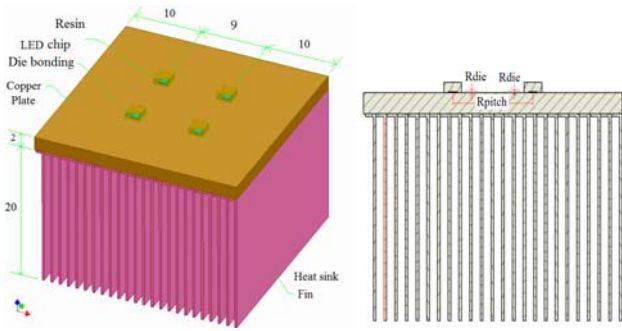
Geometrical dimensions and materials of an LED 4-chip package module
